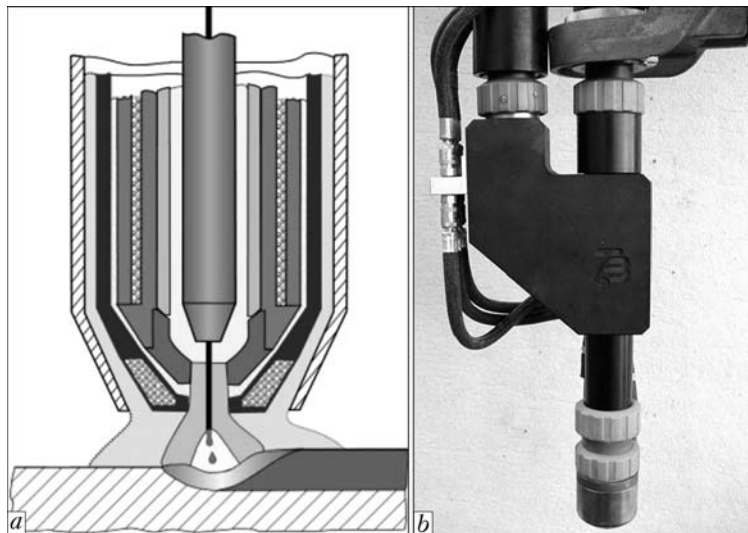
Schematic of the process of hybrid consumable-electrode PAW with annular hollow anode and axial feed of electrode wire (a) and PLM 500 welding head of TBI for this method of welding (b)
